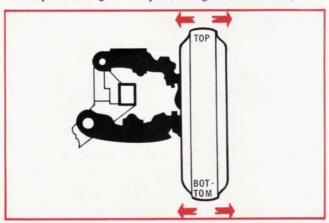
Attempt to Move Wheel Inboard or Outboard to Check for Any Wheel Bearing Free Play
